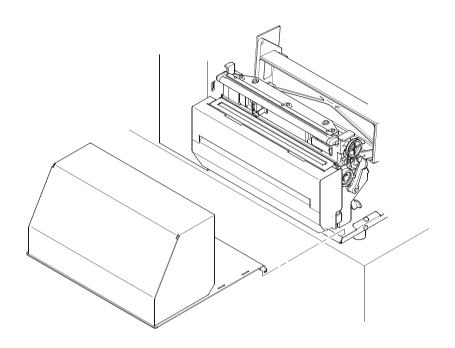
Attaching the Cutter Tray Bin to the Cutter Tray Base
